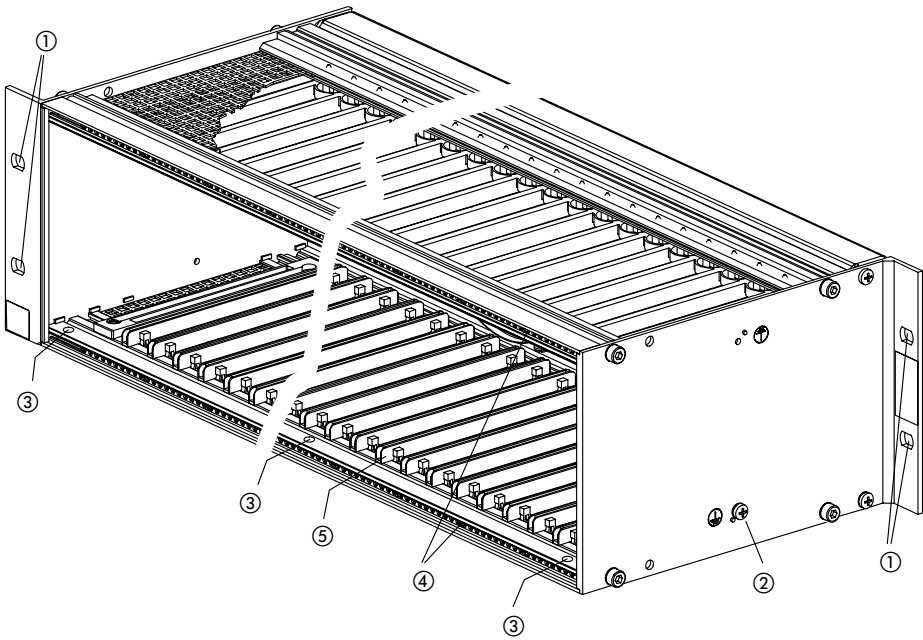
Setup of the racks for mounting plate installation (left) and front mounting (right)
